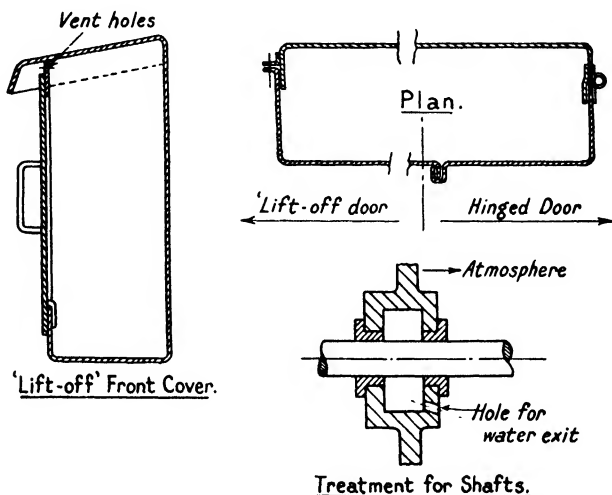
METHOD OF RAINPROOFING OPERATING MECHANISM HOUSINGS
